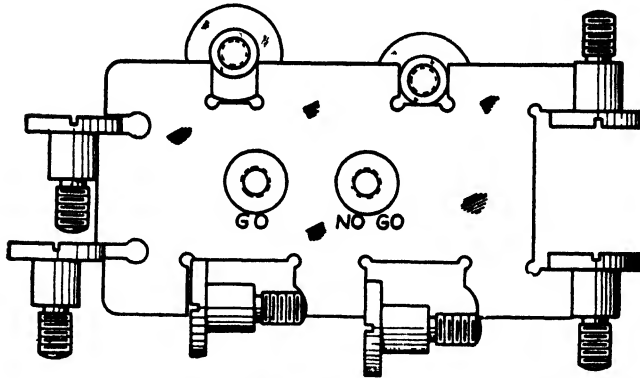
Combination Gauge for a Shoulder Screw.
